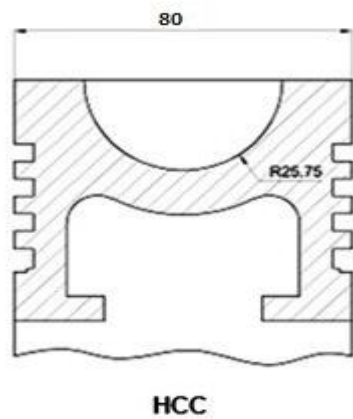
shows the hemispherical combustion chamber shape and having the 80mm bore diameter with 25mm radius.
